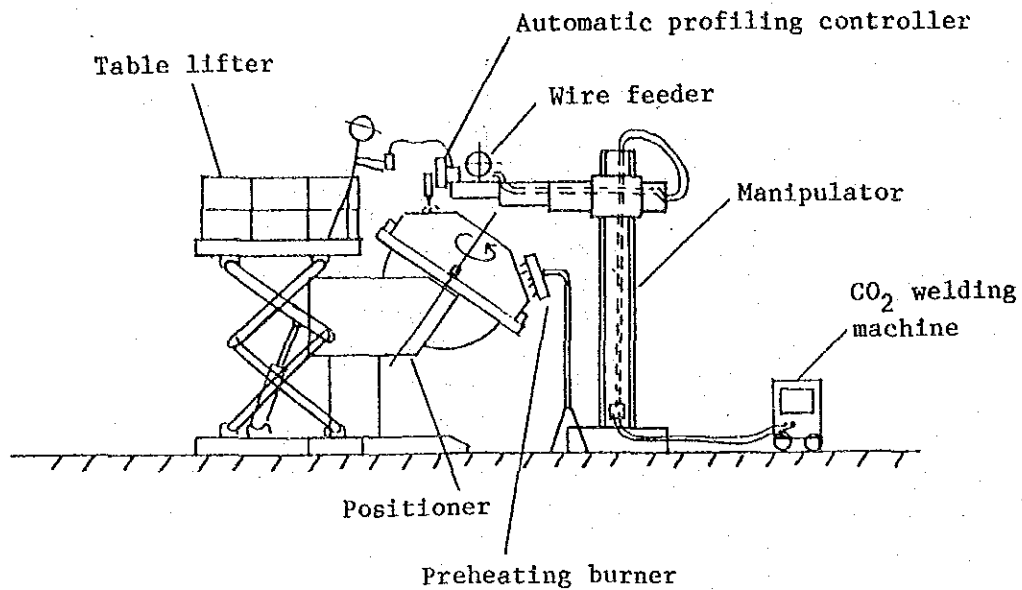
Structure of Automatic Welding System
